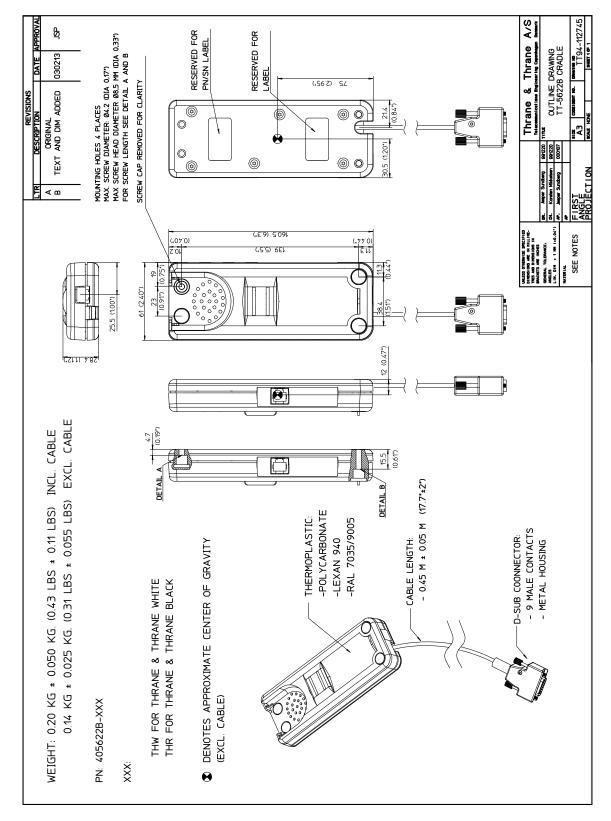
Outline drawing: TT-5622B 2-Wire Cradle
